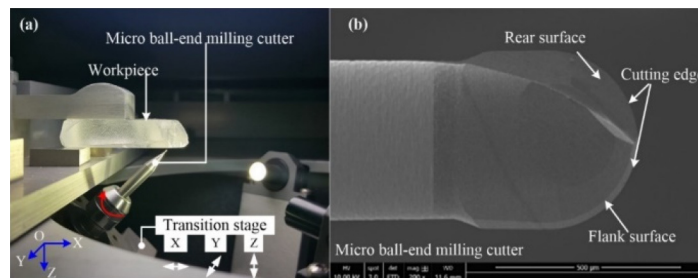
Images of machining equipment: (a) the micro-milling sub-system; (b) the micro ball-end milling cutter.
